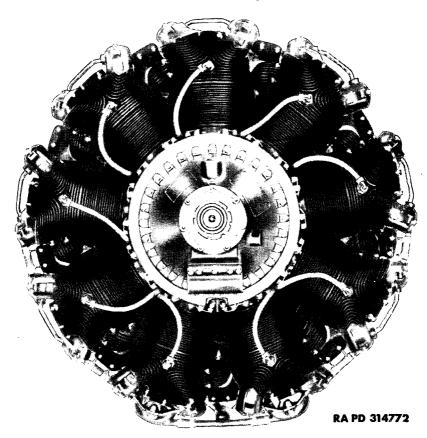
Front View of Engine with Cowling, Clutch, Flywheel,
